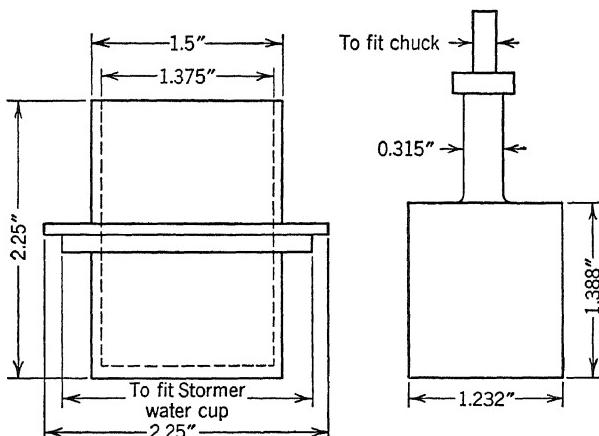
Machine drawing of modified cup and bob for Stormer viscometer.
